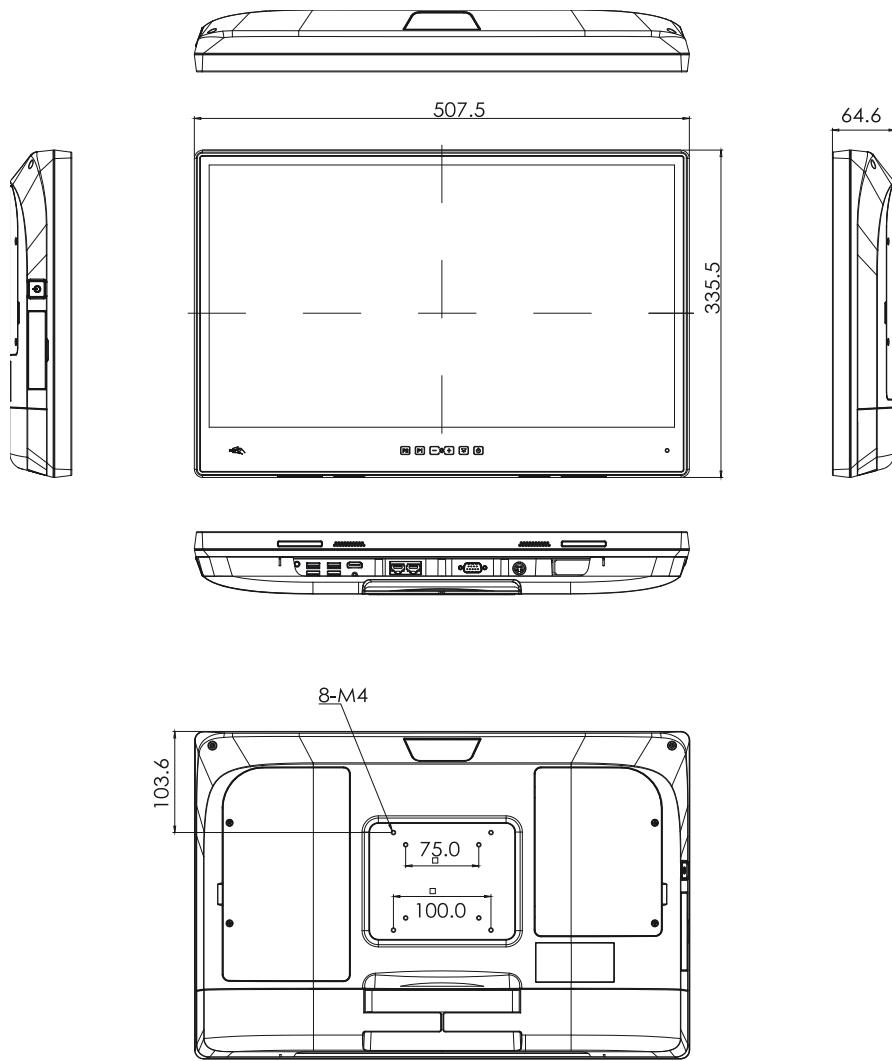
POCi-W22C-ULT5 Dimensions (mm)
